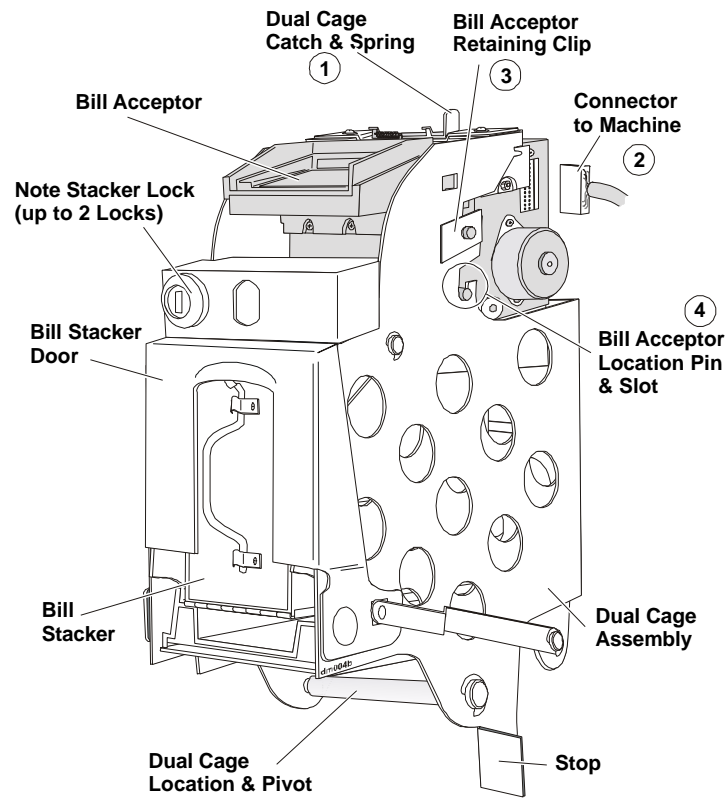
Dual Cage Housing and Bill Acceptor Access
